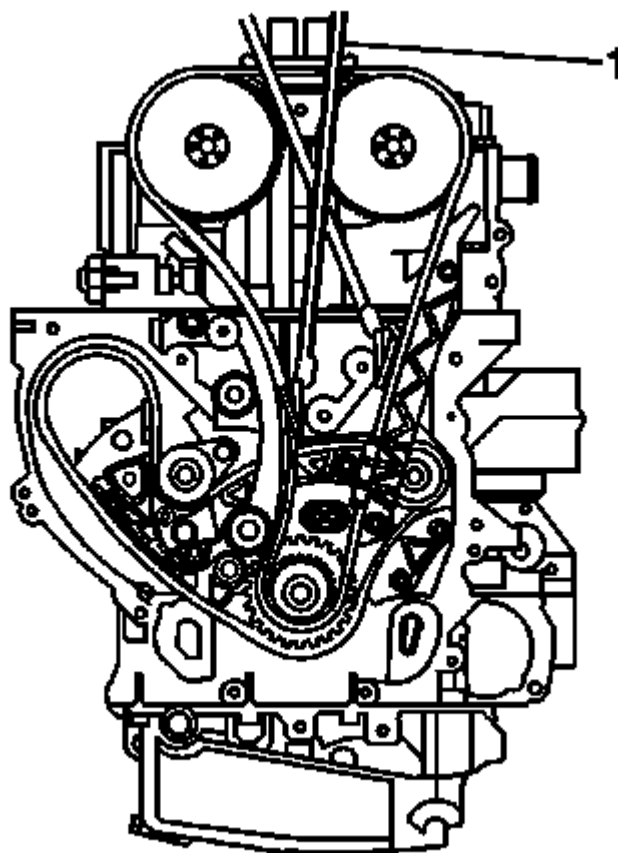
Identifying Timing Chain & Chain Retention Tool
